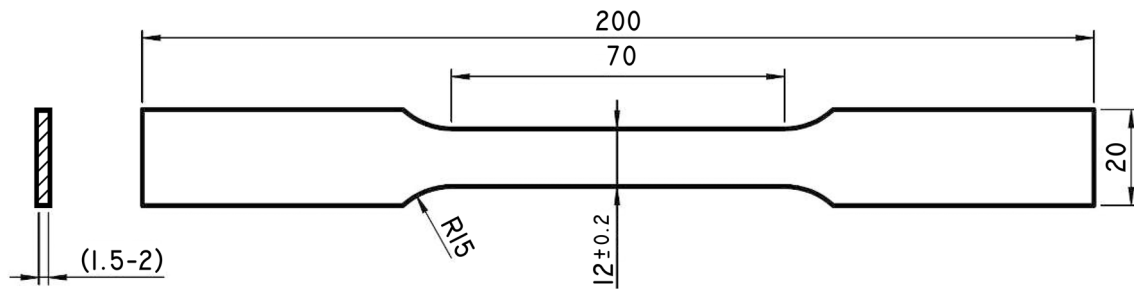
Geometry of specimen for tensile test (all dimensions are in mm)
